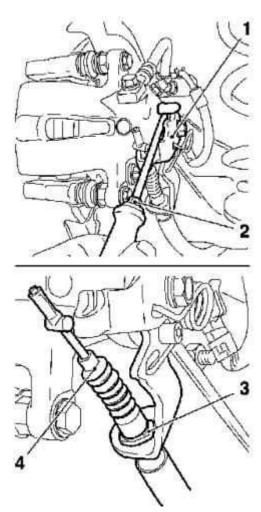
Removing the brake pads (pre-surgery): 1 - lever caliper, 2 - screwdriver 3 - clip 4 - wire the parking brake system
